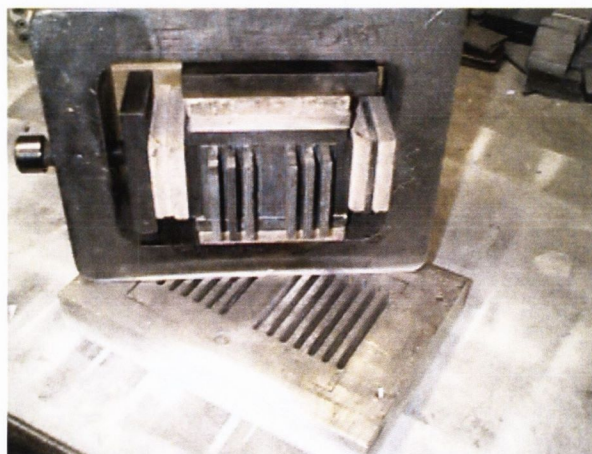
Aluminium bolster with the graphite/insulation mould system. The bolster/mould is positioned on top of the aluminium filling grate.
